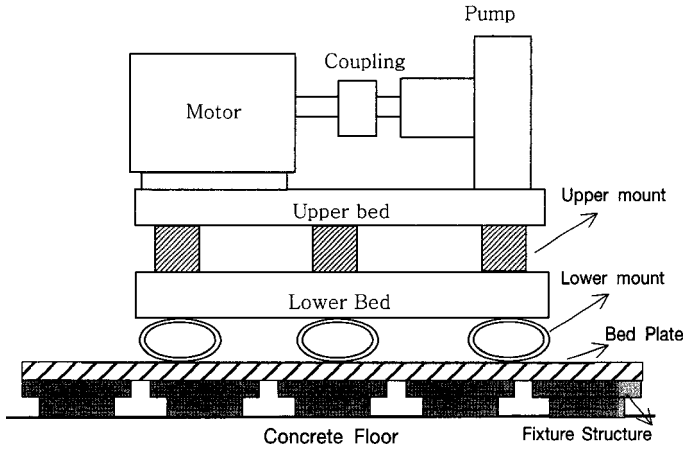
Resiliently mounted pump/motor assembly on the bed plate lying on fixture structure.
